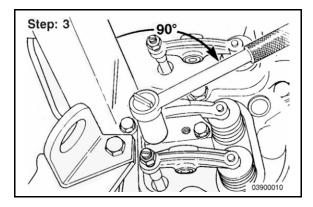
ROTATE THE 12 MM PEDESTAL/CYLINDER HEAD CAPSCREWS
